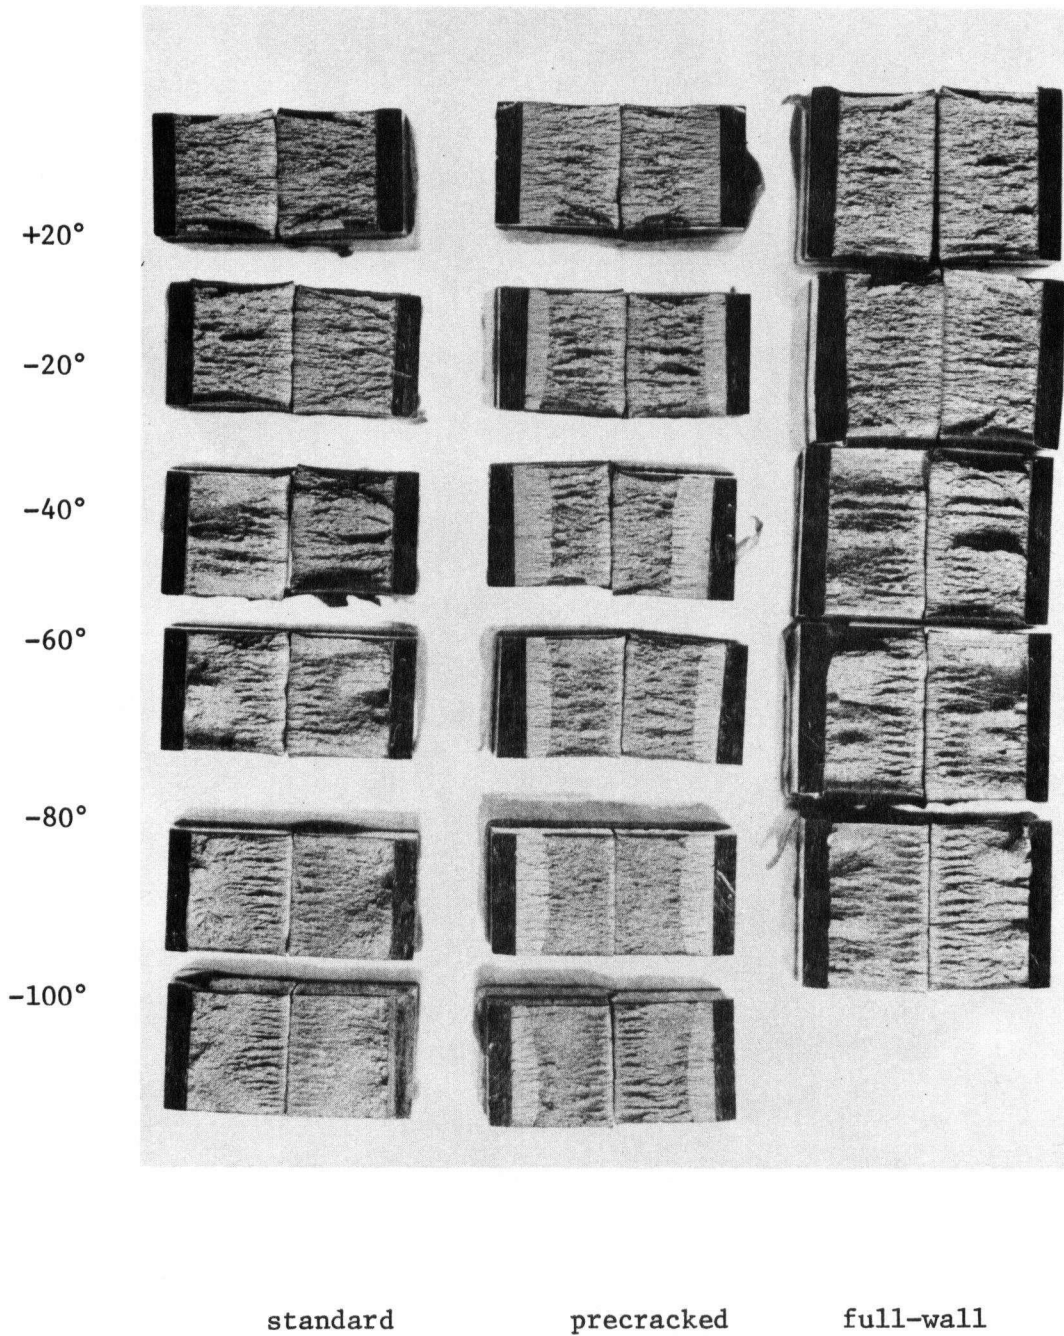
AF-1 steel fracture surfaces, crack parallel to rolling direction.
